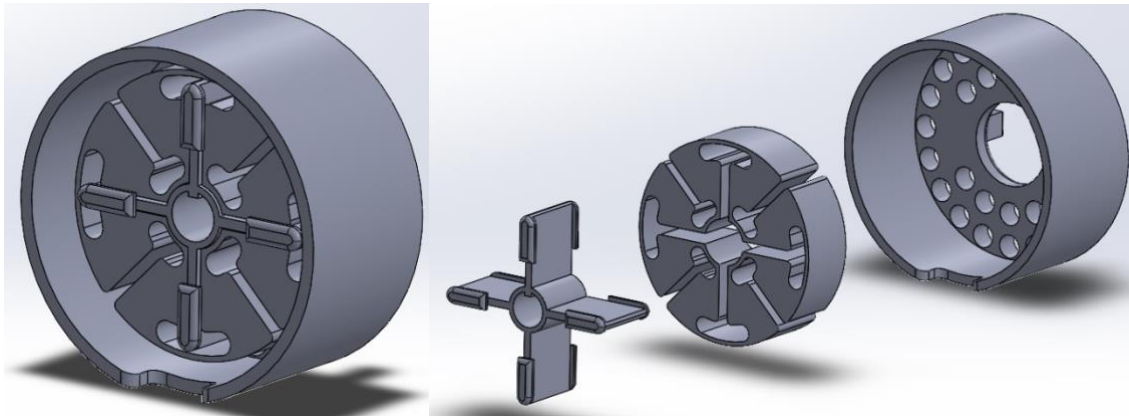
Left – Brake Assembly, Right – Exploded view of Brake Assembly
